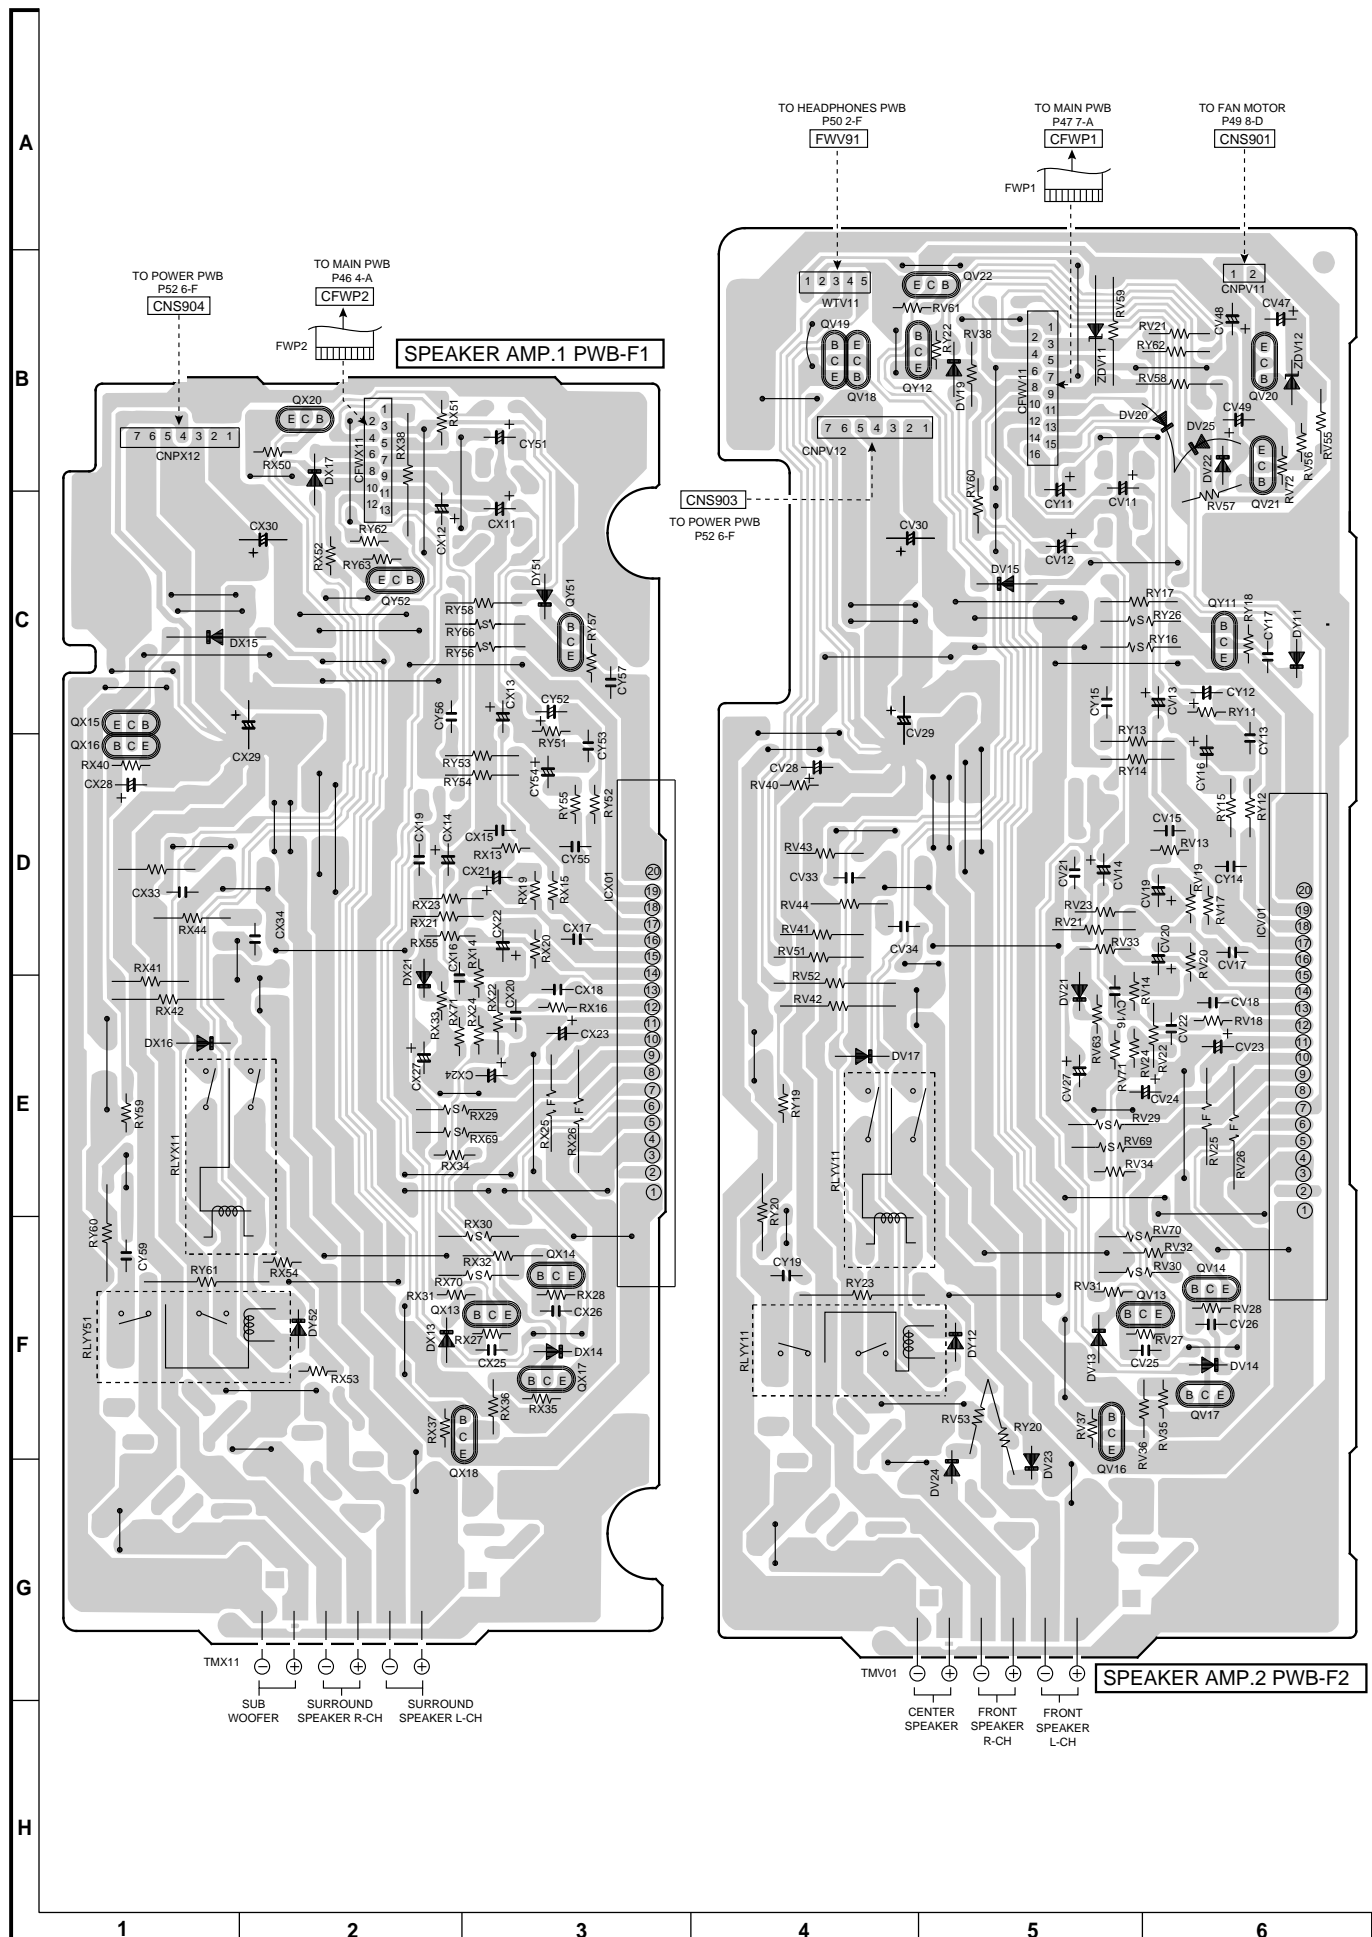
WIRING SIDE OF P.W.BOARD (9/9)
